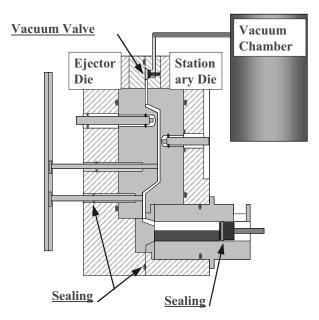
Schematic drawing of die system for high-vacuum die casting.
